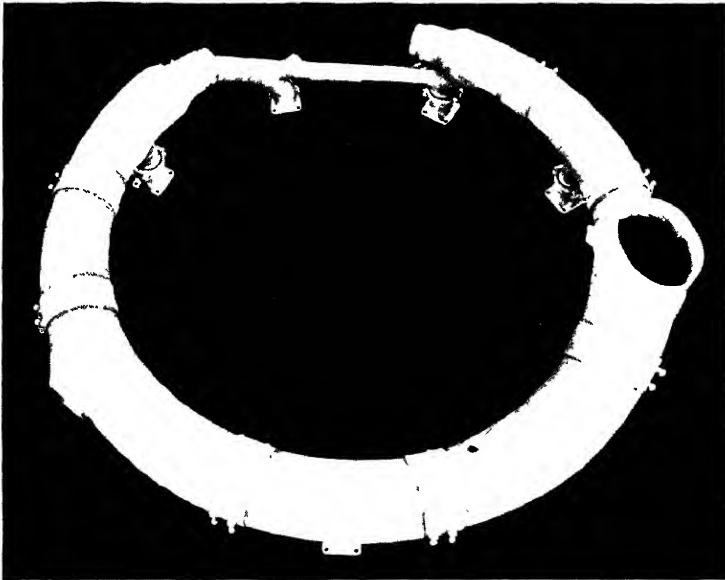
Nine-cylinder radial-engine exhaust collector ring with intensifier tubes for carburetor air heating. (*Solar Aircraft Co.*)
